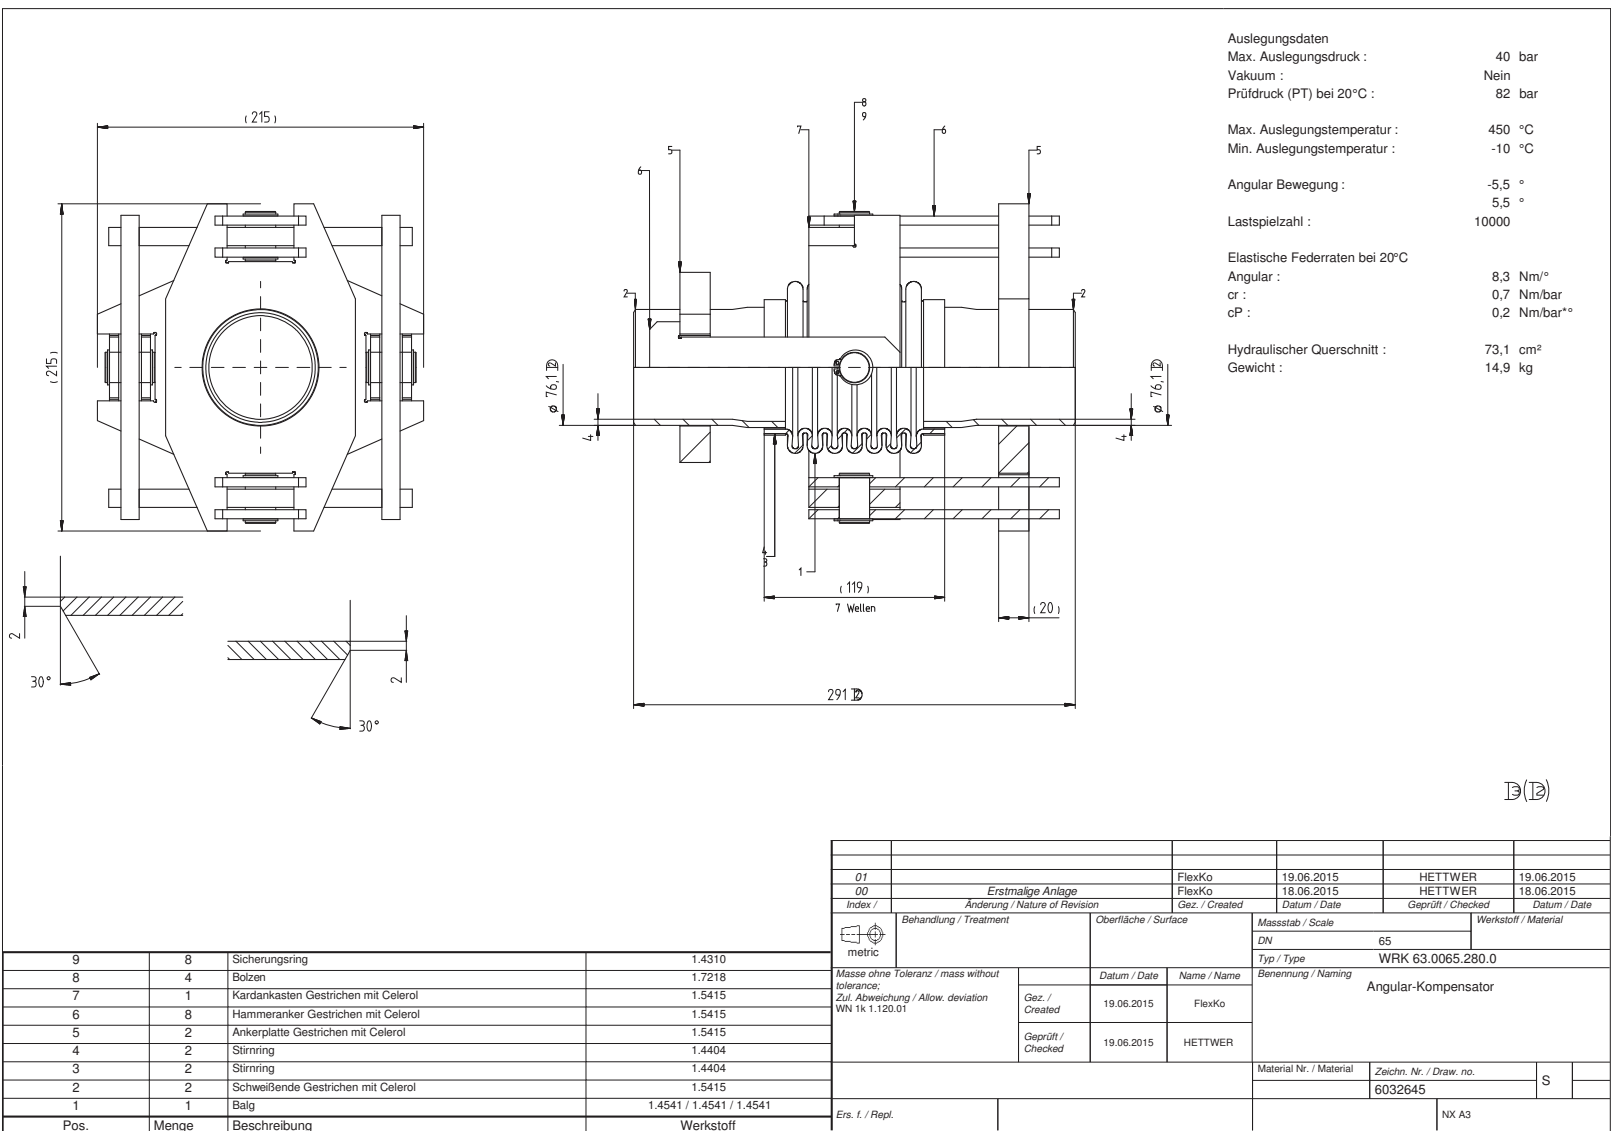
Technical drawing and data sheet of the angular expansion joints (gimbal hinged)
